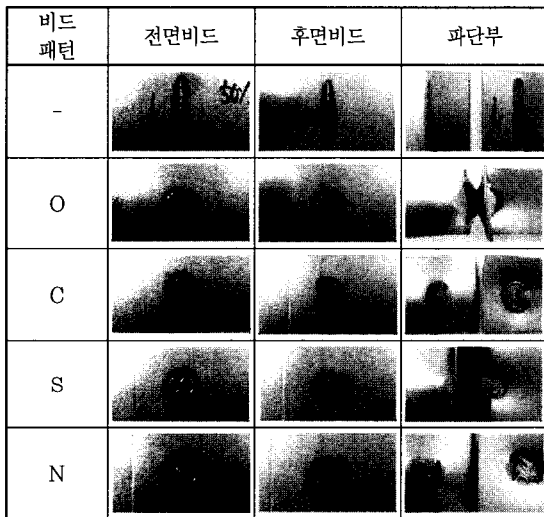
Photograph of front bead, back bead and fracture of specimens
